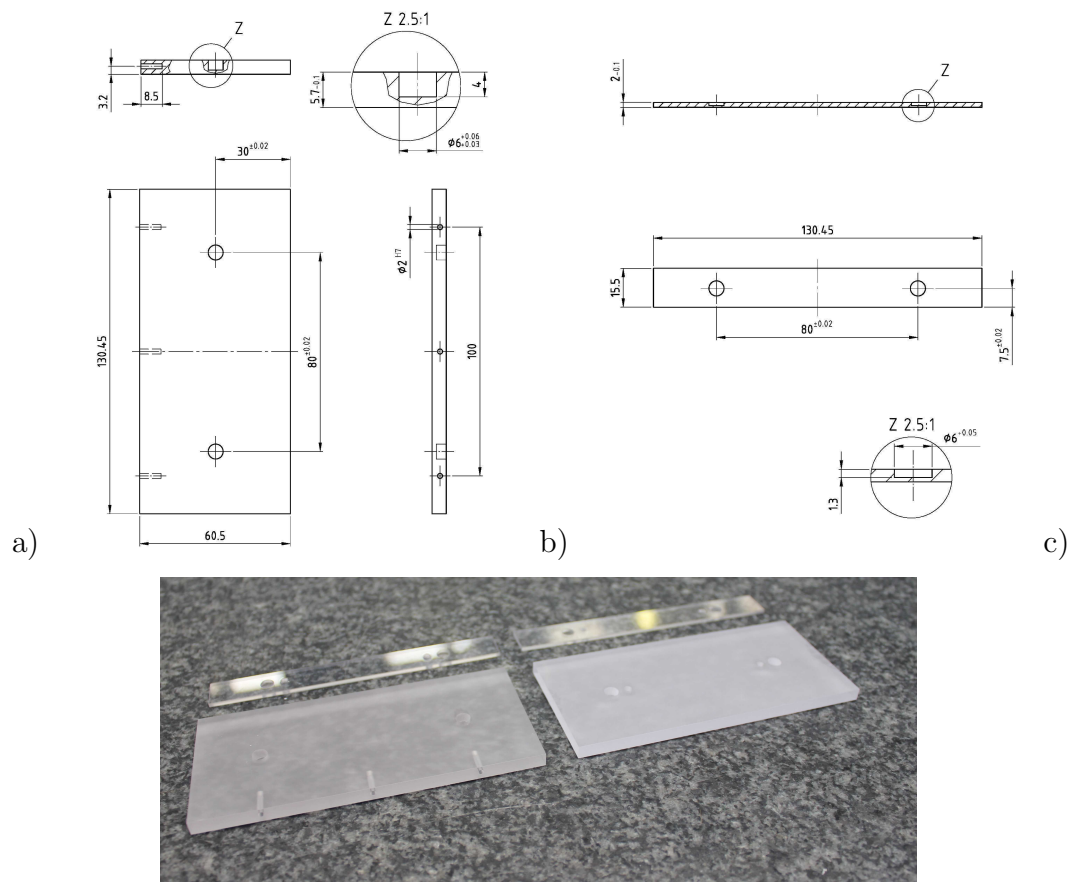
A drawing of the endpiece a) on readout side and b) on mirror side of a fibre mat.c) A photo of the endpiece on readout side and on mirror side of a fibre mat.
